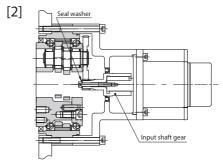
Assembly procedure UA series (assembly example 1)
